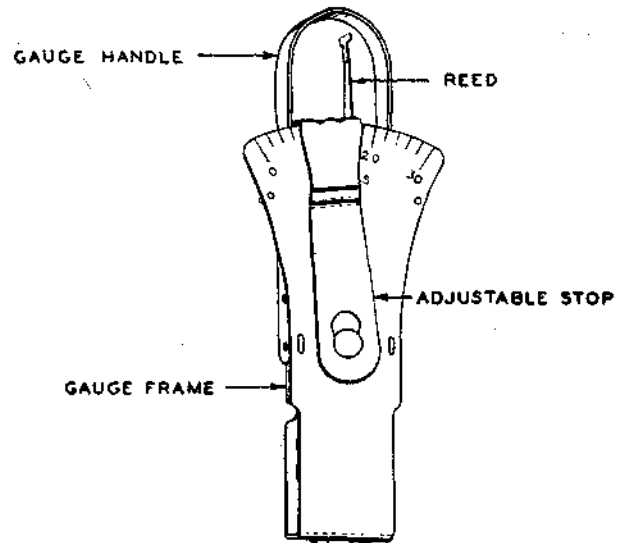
No. 70H Gram Gauge with the Handle Folded Back
